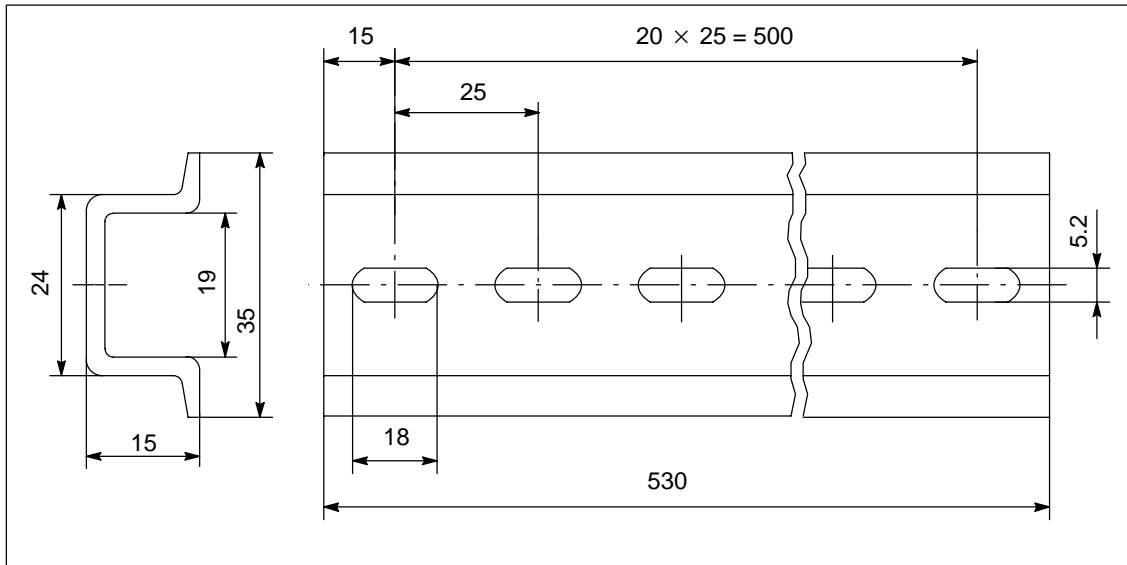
Dimension Drawing of the 530 mm Standard Rail
